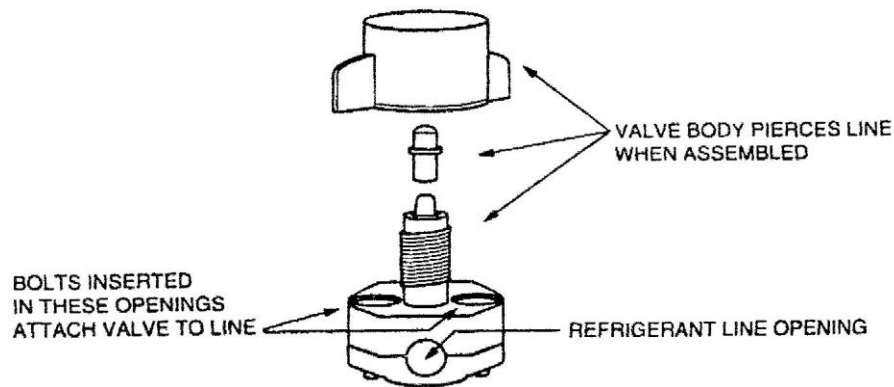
A saddle valve that is installed on small refrigeration systems. Upon installation, it pierces the refrigerant line. Manufacturers recommend that this type of valve should be installed on copper or aluminum tubing.
